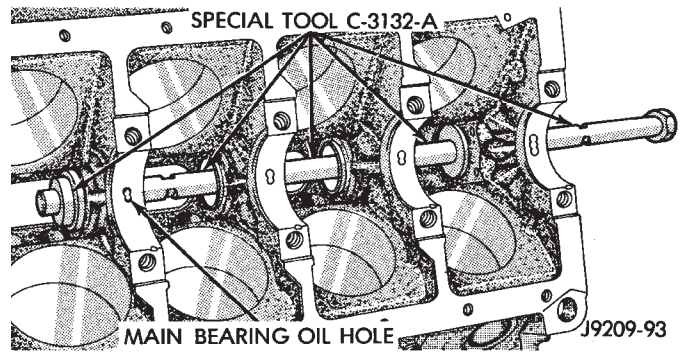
Camshaft Bearings Removal/Installation with Tool C-3132-A
